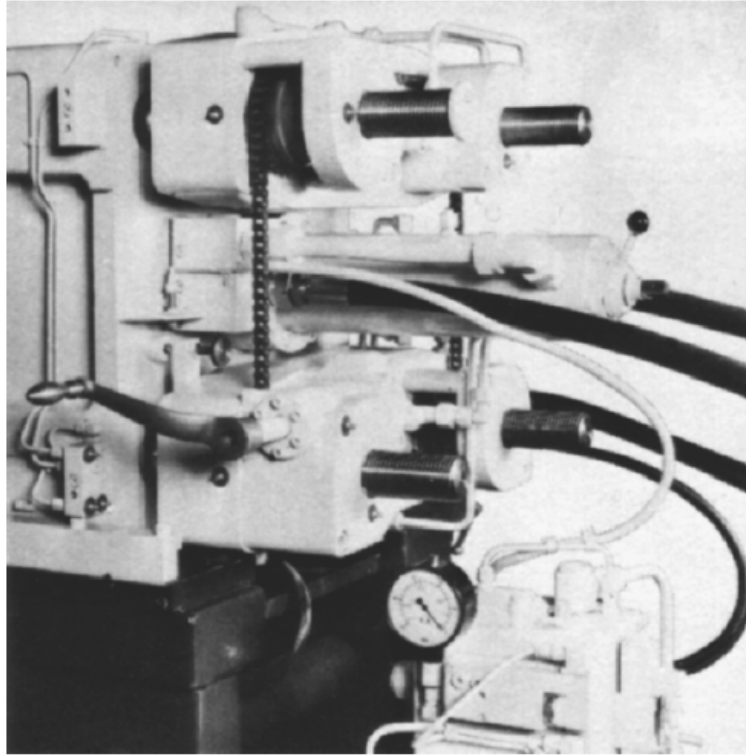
Clamp-adjusting ring gear.¹⁴⁸
